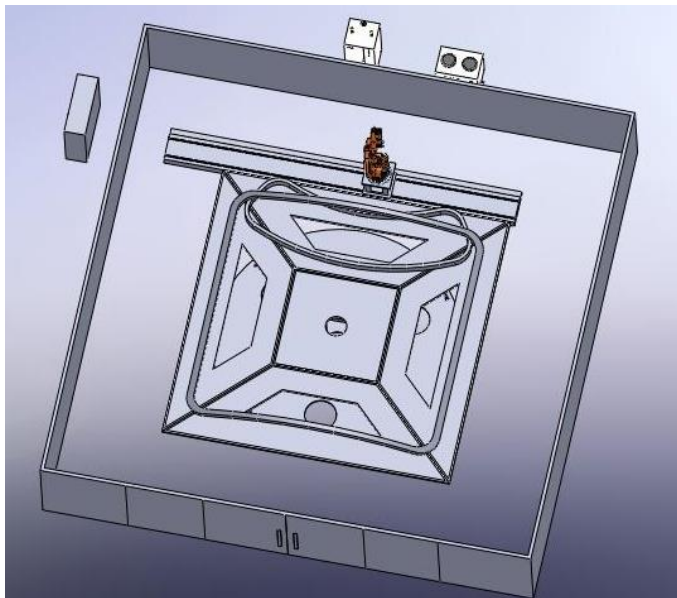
Overview of Scheme 1 for case laser welding
